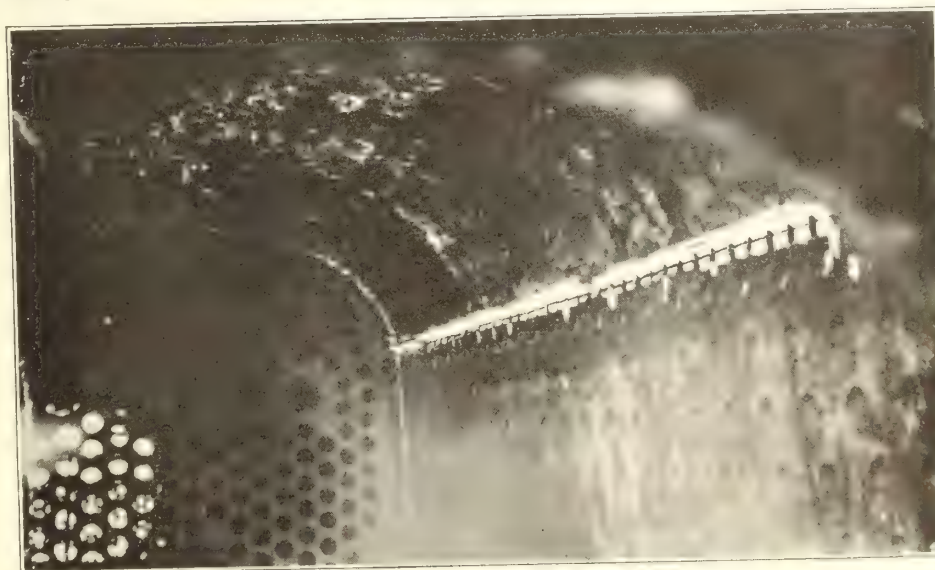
Sheet Inside Fire Box Ready for Welding.
